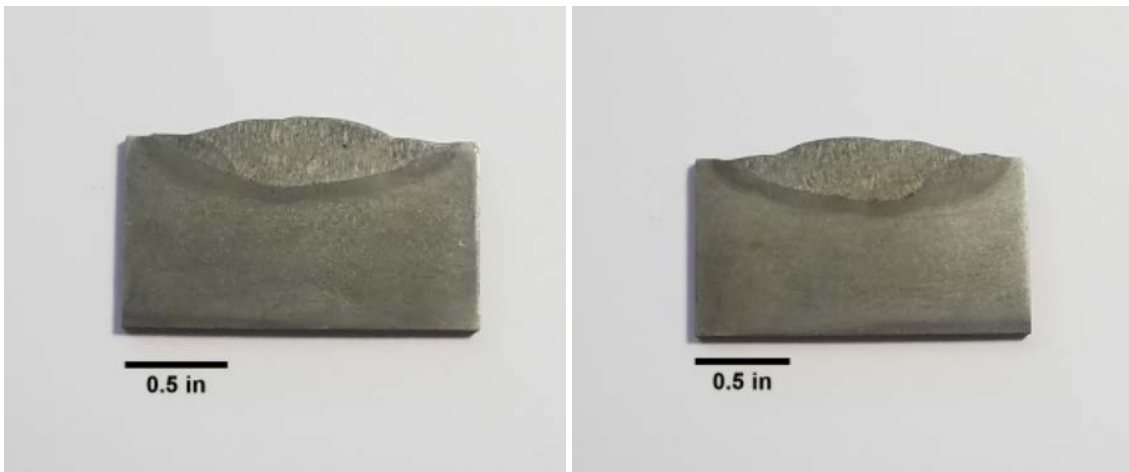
Etchings from the first weld (26.1 volts and 355 ipm).
